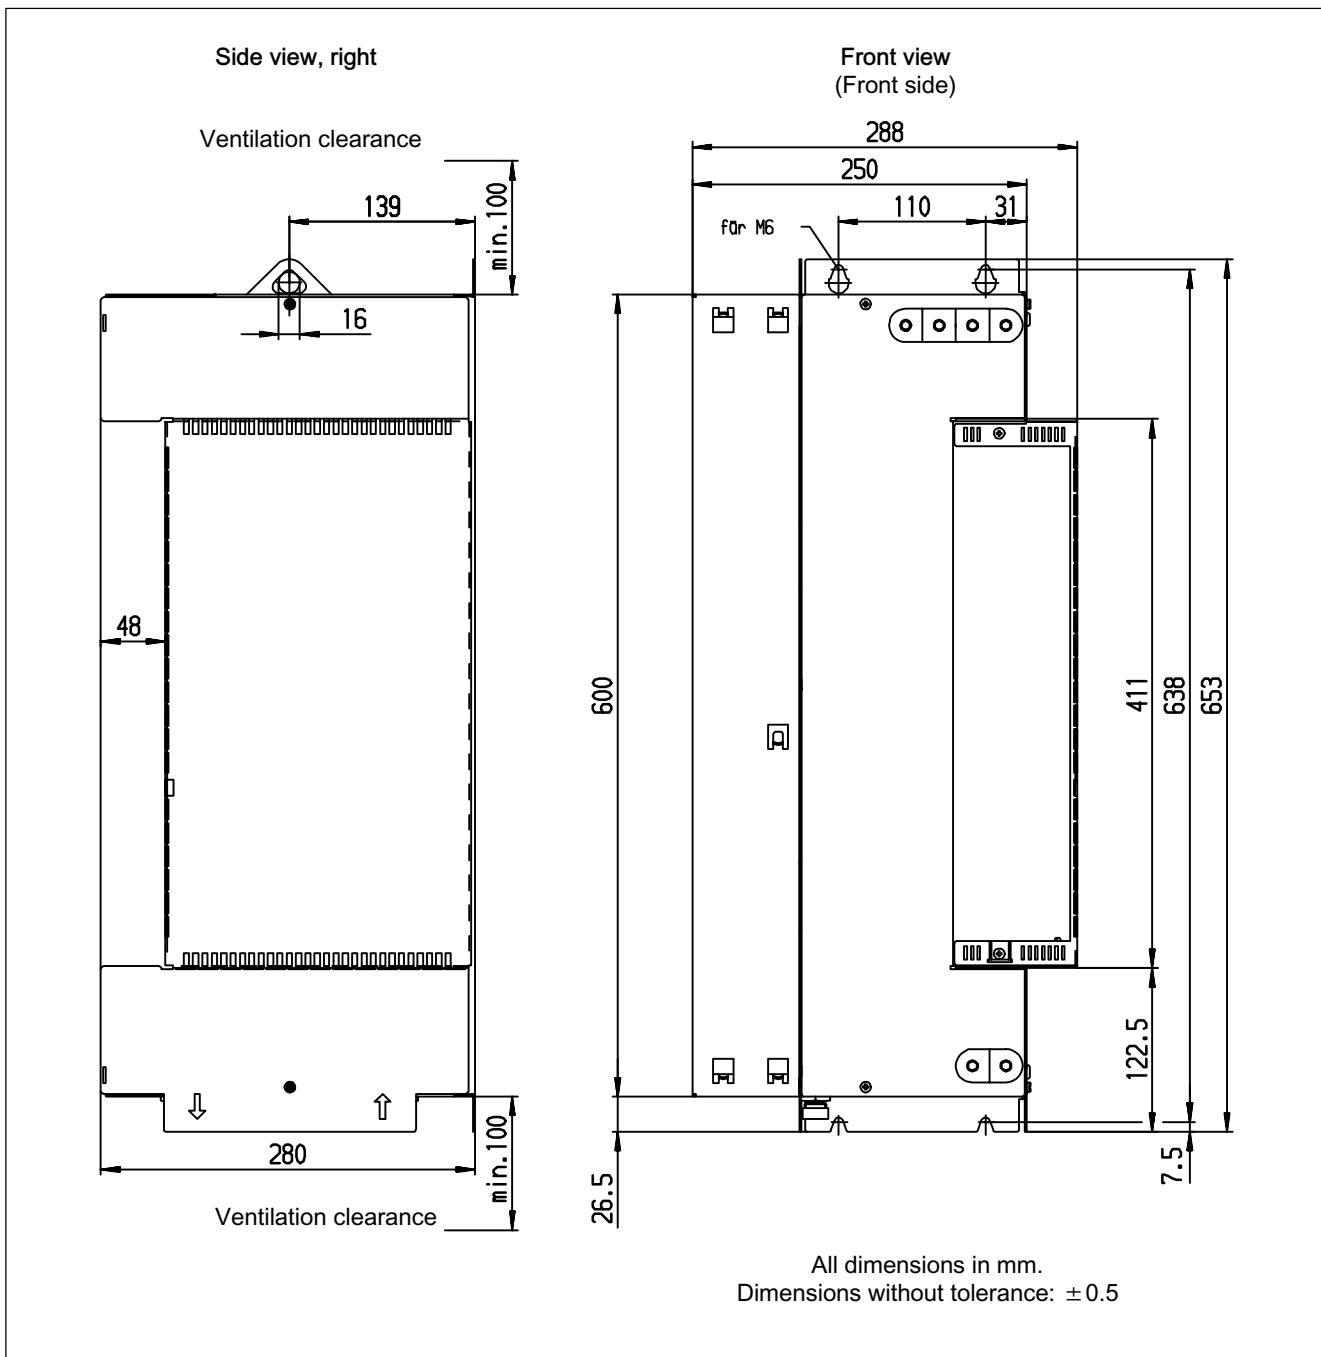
Dimensioned drawing: PSI 62xx.xxx W1
